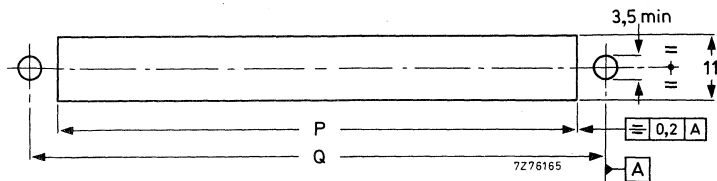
Panel cut-out; see Table 3 for dimensions P and Q.
